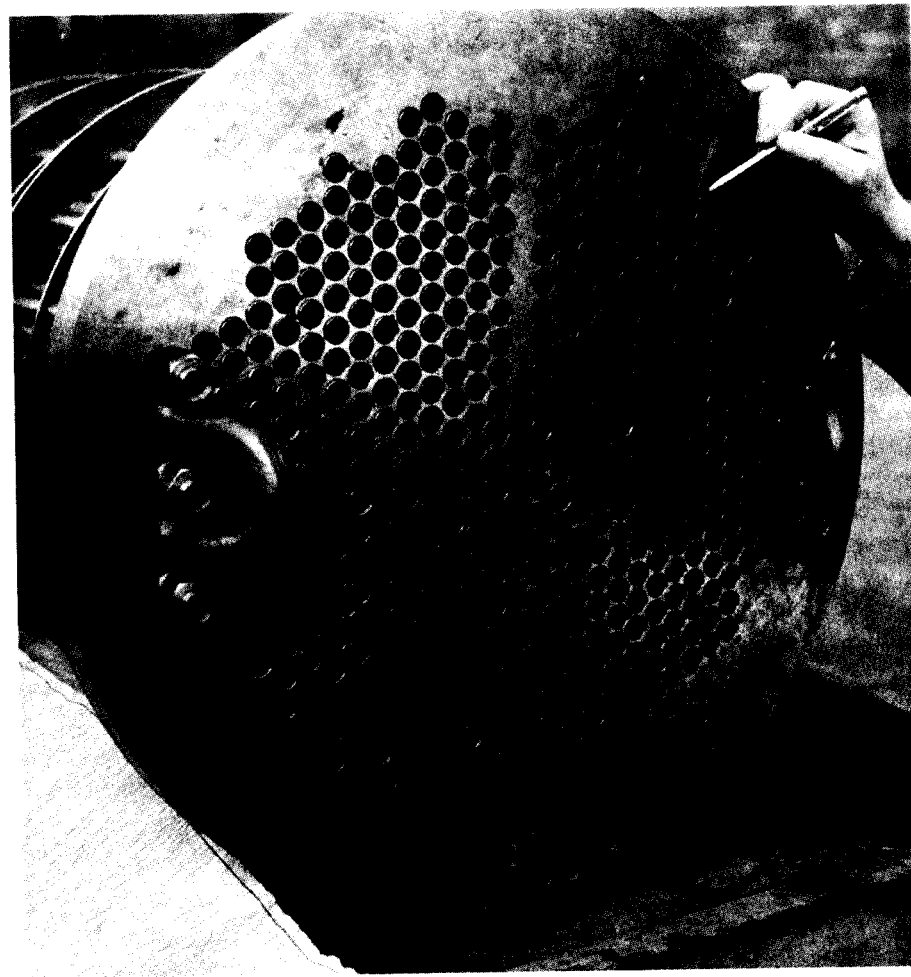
Tube sheet of lube oil cooler showing tubes expanded into drilled tube sheet
